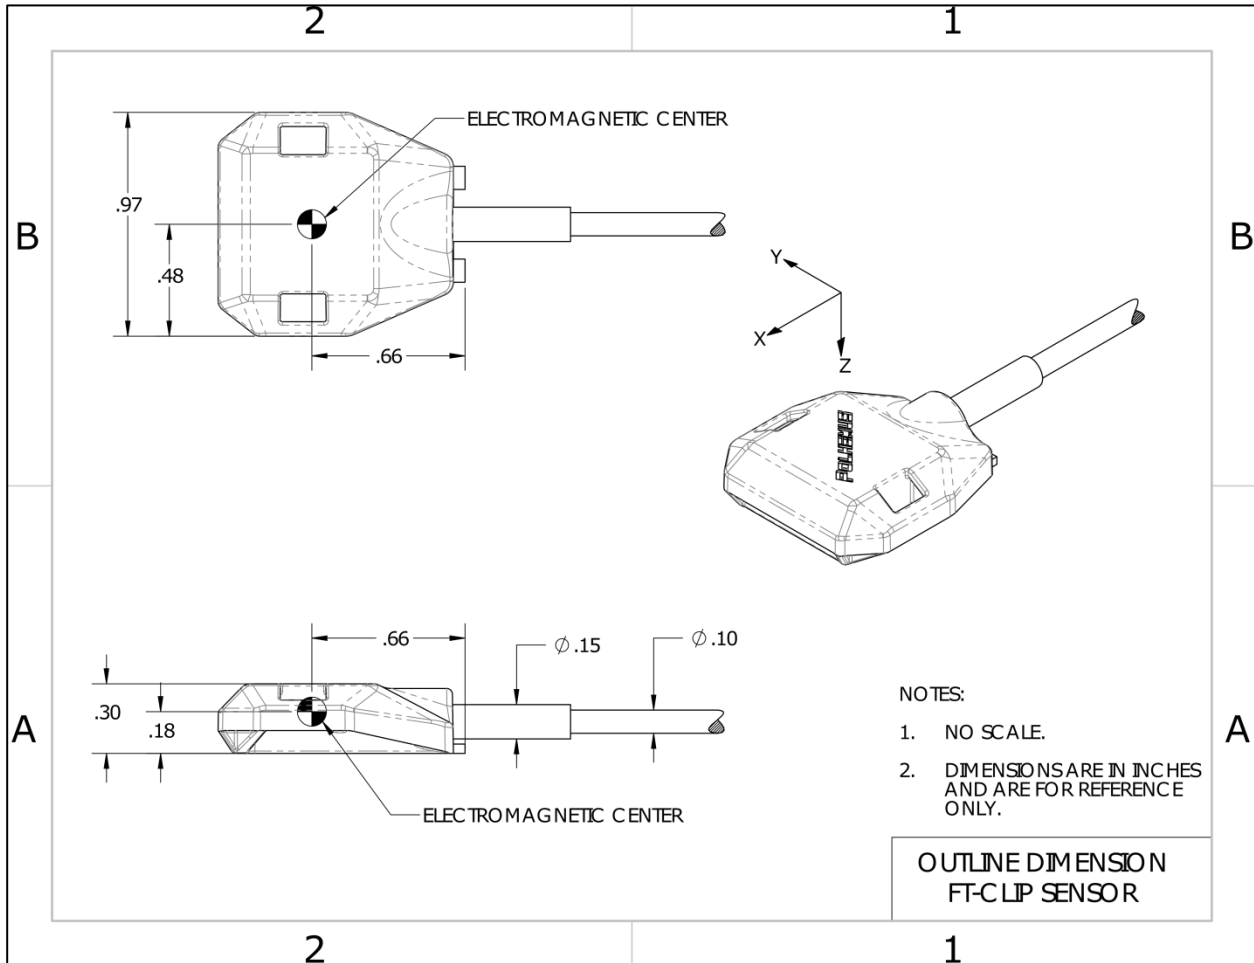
OUTLINE DIMENSIONS (APPROX.), VIPER™ FT-CLIP SENSOR
